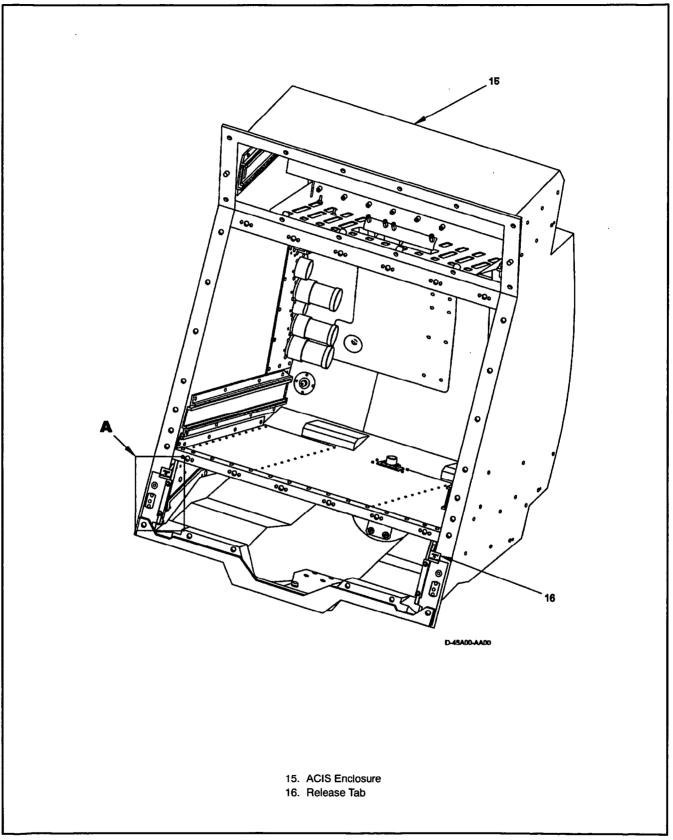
Keyboard-Trackball Assembly CA-103/ASQ-225 (Bullnose) and Control Indicator Set AN/ASQ-225 Components (Sheet 3)
